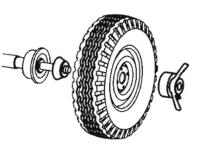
Display image of the node "New wheel" Figure 6.9 - Wheel mounting
